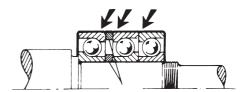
Bearing Assemblies 5F and 6F When fitting the angular contact ball bearings each bearing is positioned so, that the wider edge of its outer race faces the spacing rings.
